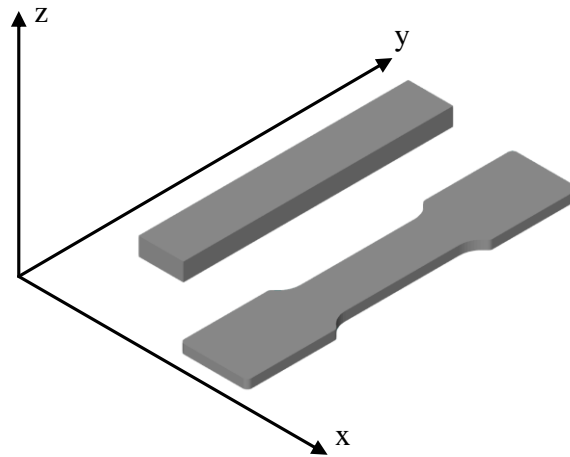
The dumbbell-shaped and the prismatic specimen's orientation on the building platform
